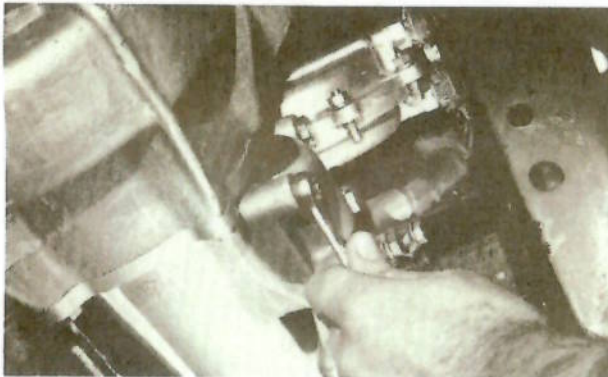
REMOVING THE DIAPHRAGM CHAMBER FROM THE TRANSFER FRONT DRIVE EXTENSION HOUSING.
